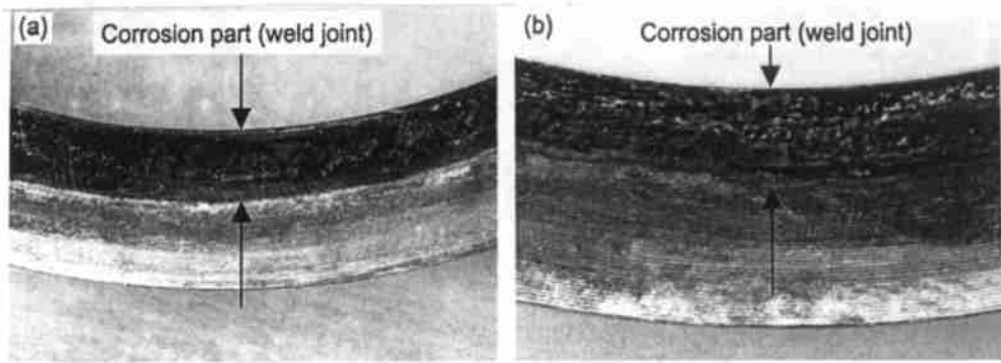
Corrosion site of failed stainless steel flange. (a) original corroded surface of stainless steel flange (b) corroded flange surface after removing corrosion product
